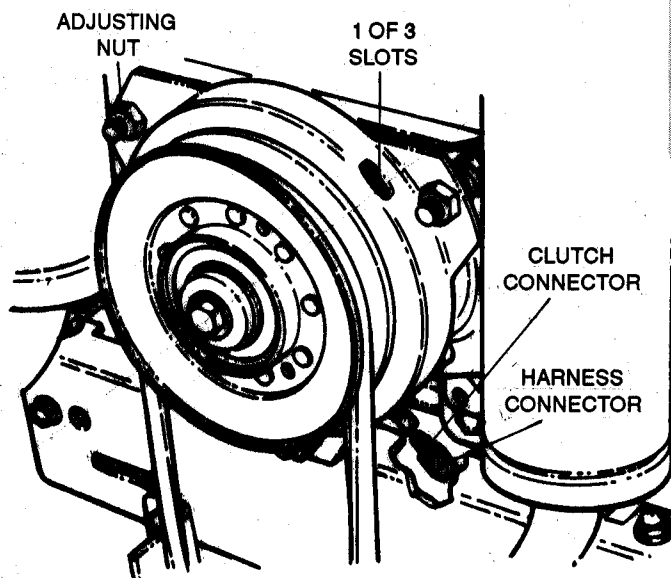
CLUTCH ELECTRICAL CONNECTOR
